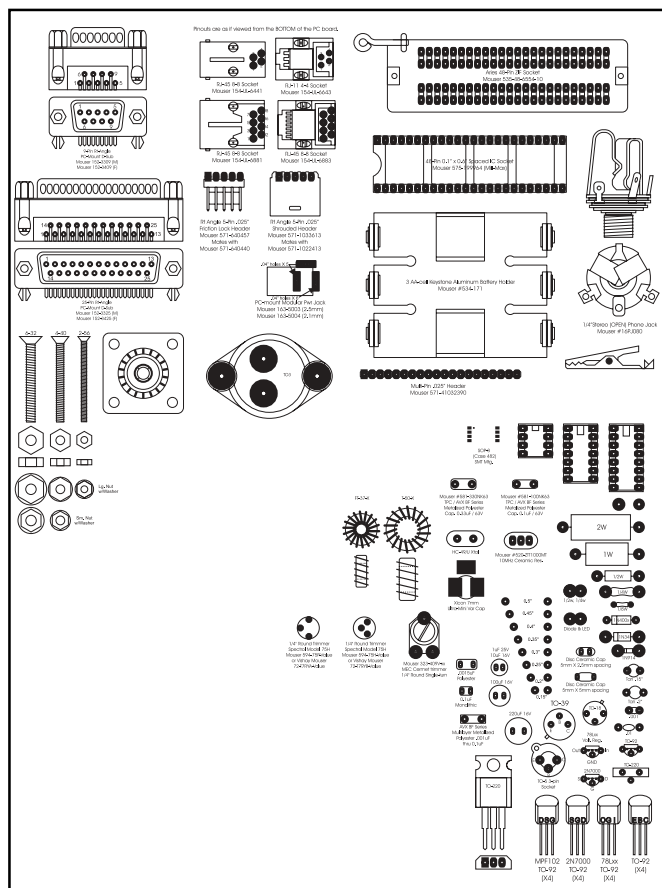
The symbols in the CorelDraw PC-board pad-configuration library (Electr Pcb pads.cdr) of N0SS.
